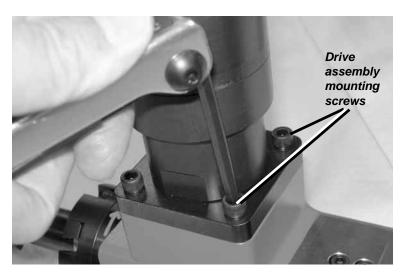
Loosen the 4 drive assembly mounting screws.
